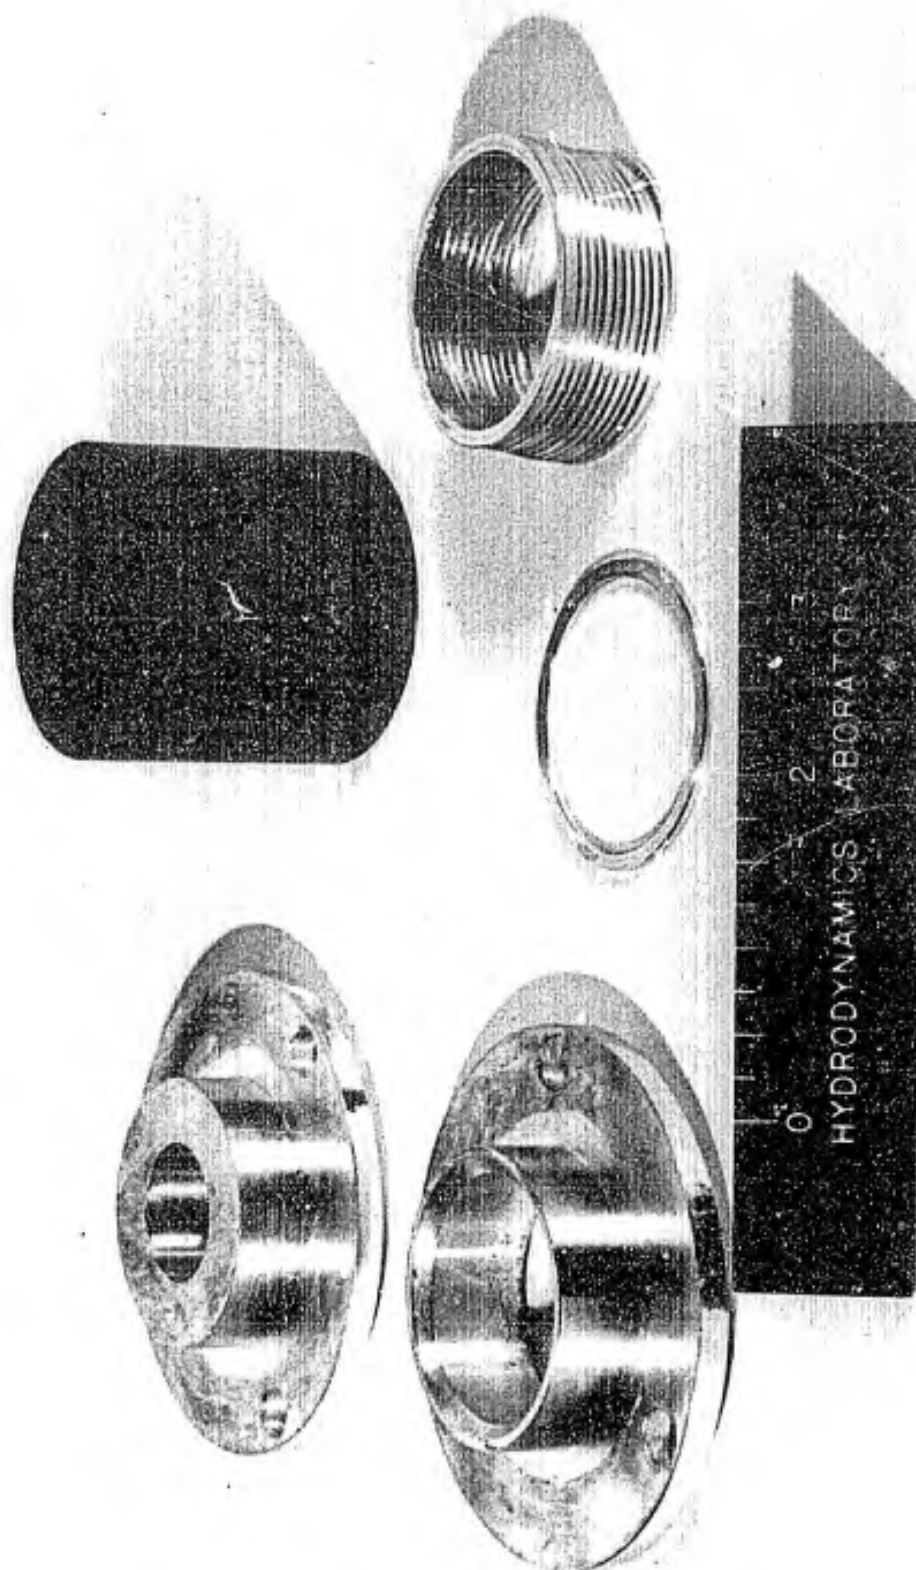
BIAXIAL TEST SPECIMEN COMPONENTS
